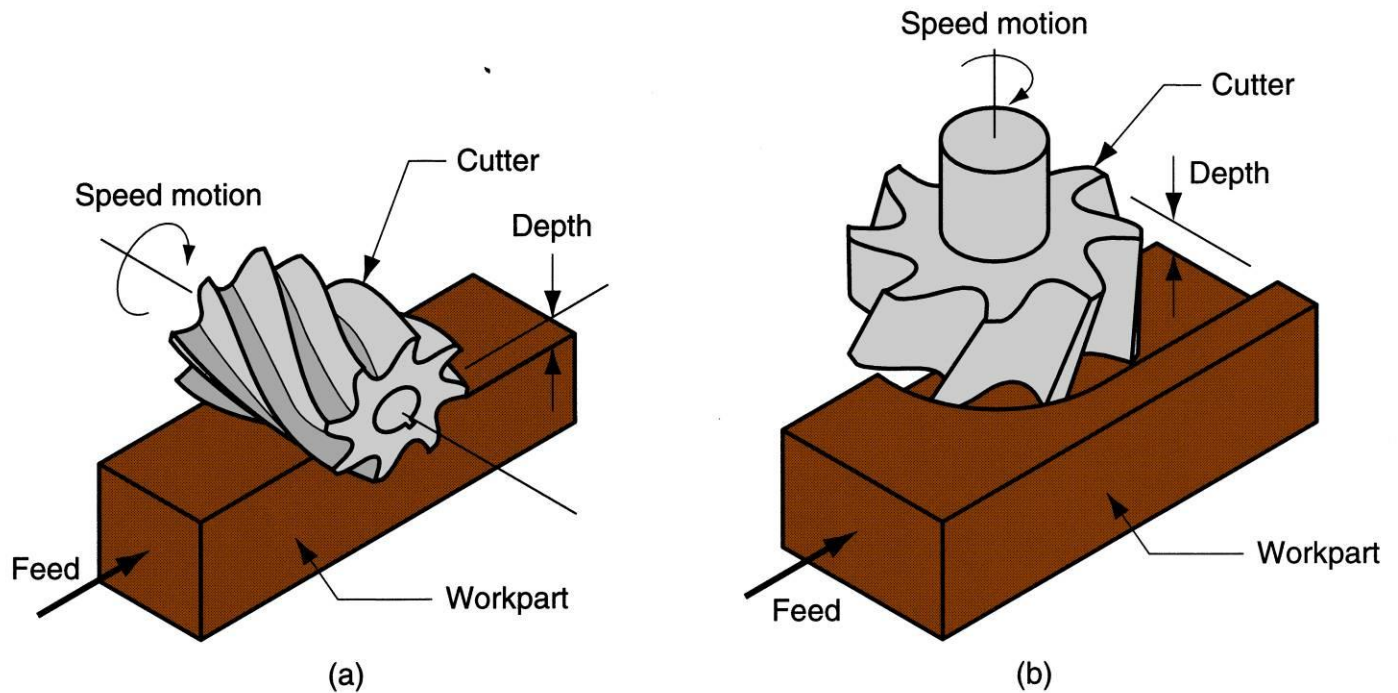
Two forms of milling: (a) peripheral milling, and (b) face milling.
